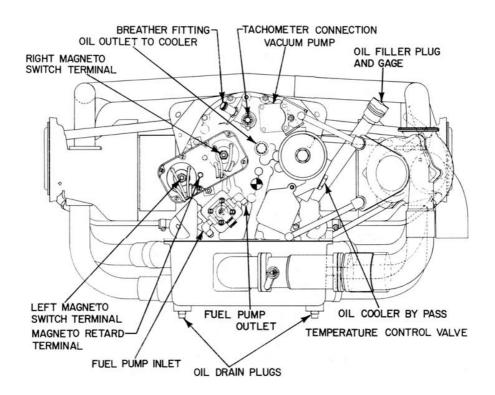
Installation Drawing – Rear View – TO-360-C
